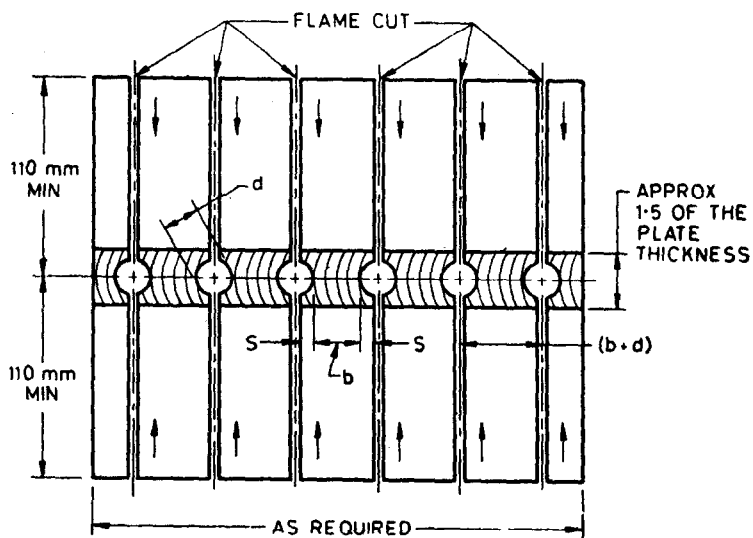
TEST PIECE FOR THE PREPARATION OF NOTCHED TENSILE AND NOTCHED BEND TEST SPECIMENS
